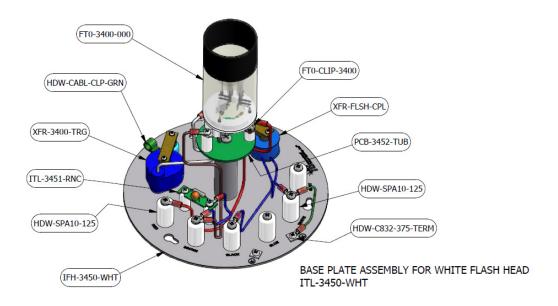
IFH-3400 Dual Flash Head Component Layout, Isometric View
